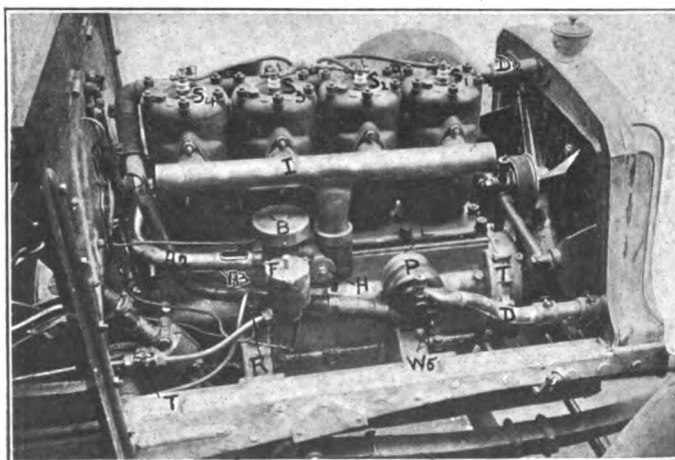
Intake side of Panhard-Knight motor, showing carbureter water pump
